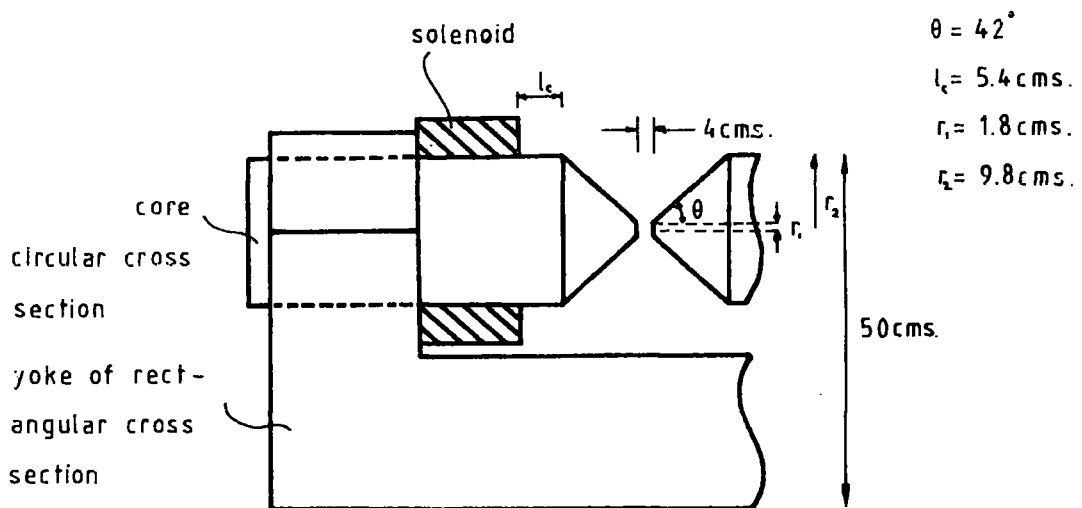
Schematic diagram showing front view of half section of original magnet design, and cross section of space available for solenoid.
